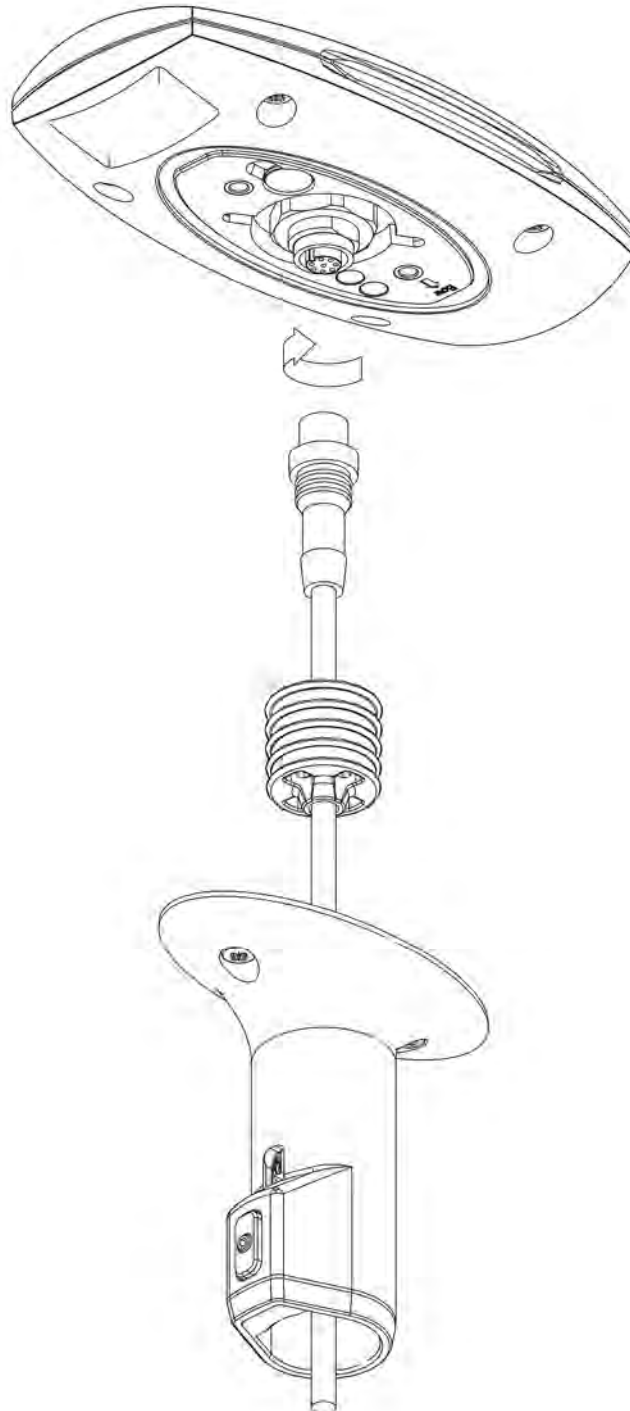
POLE MOUNT INSTALLATION STEP 5 (INTERNAL ROUTING OF THE COMMUNICATION CABLE)
